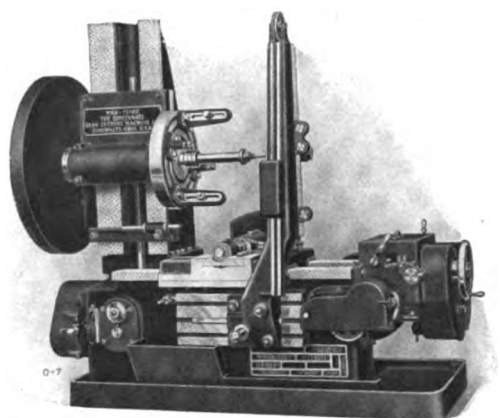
Cincinnati Automatic Spur Gear Cutters
